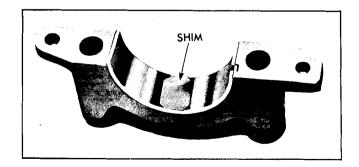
002" Shim Positioned in Adjacent Caps to Check Main Bearing Clearance With Engine in Car
